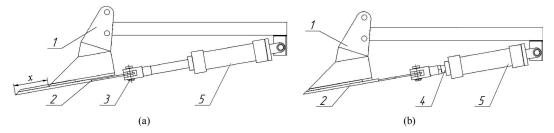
Ripper tip with dynamic cutting edge on the pneumatic accumulator: (a) – working position with cutting edge; (b) – sharp knife
